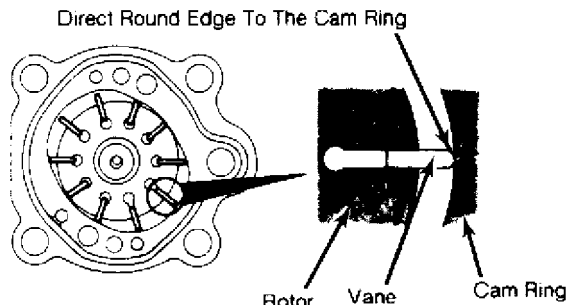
Installing Vanes Into Rotor Of Power Steering Pump
